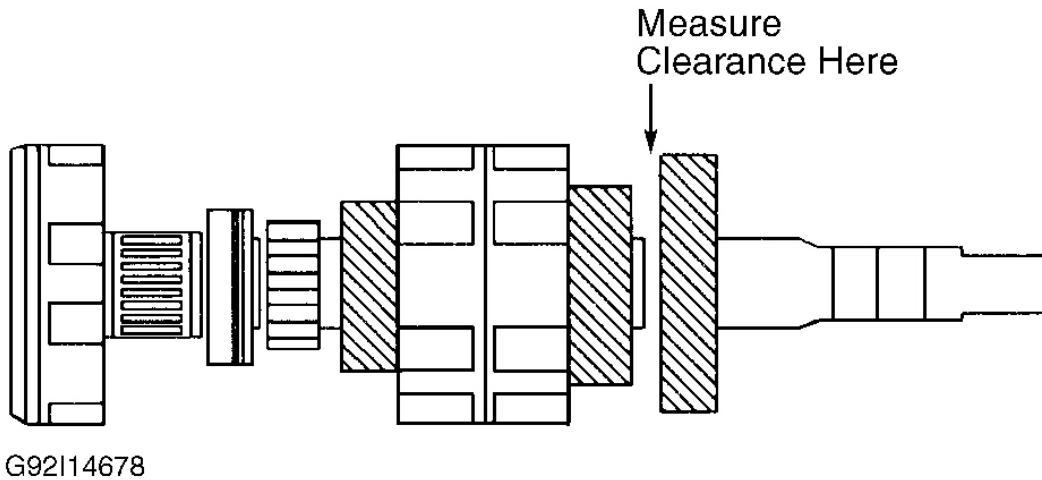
Checking 4th Gear-To-Thrust Washer Clearance
